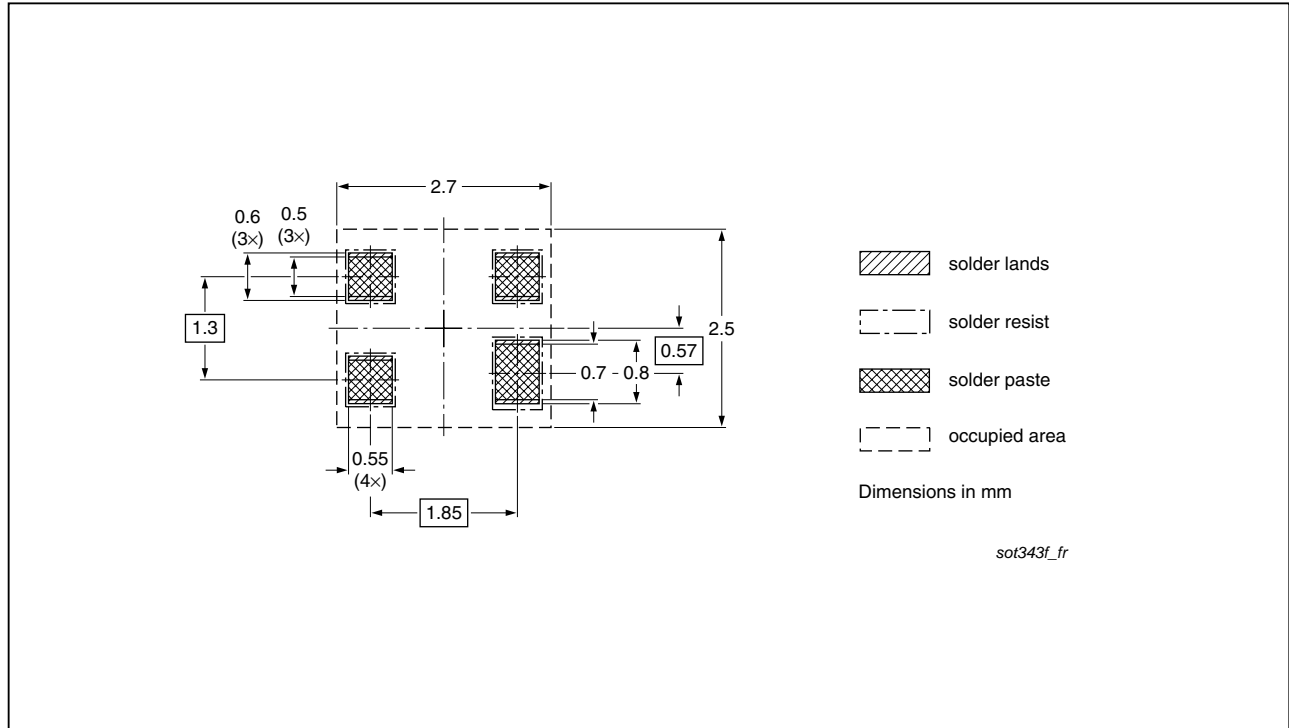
Reflow soldering footprint for SOT343F (DFP4)
